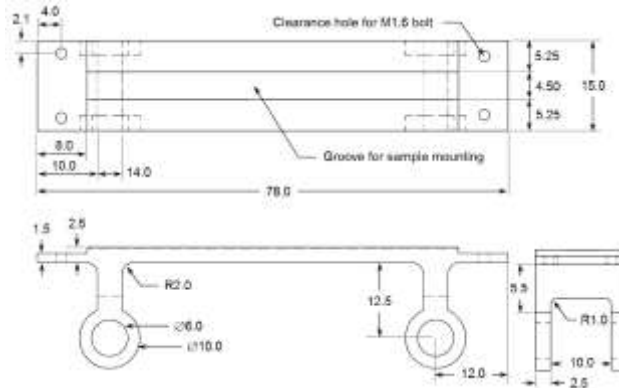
Technical drawings of the springboard-shaped sample holder.
